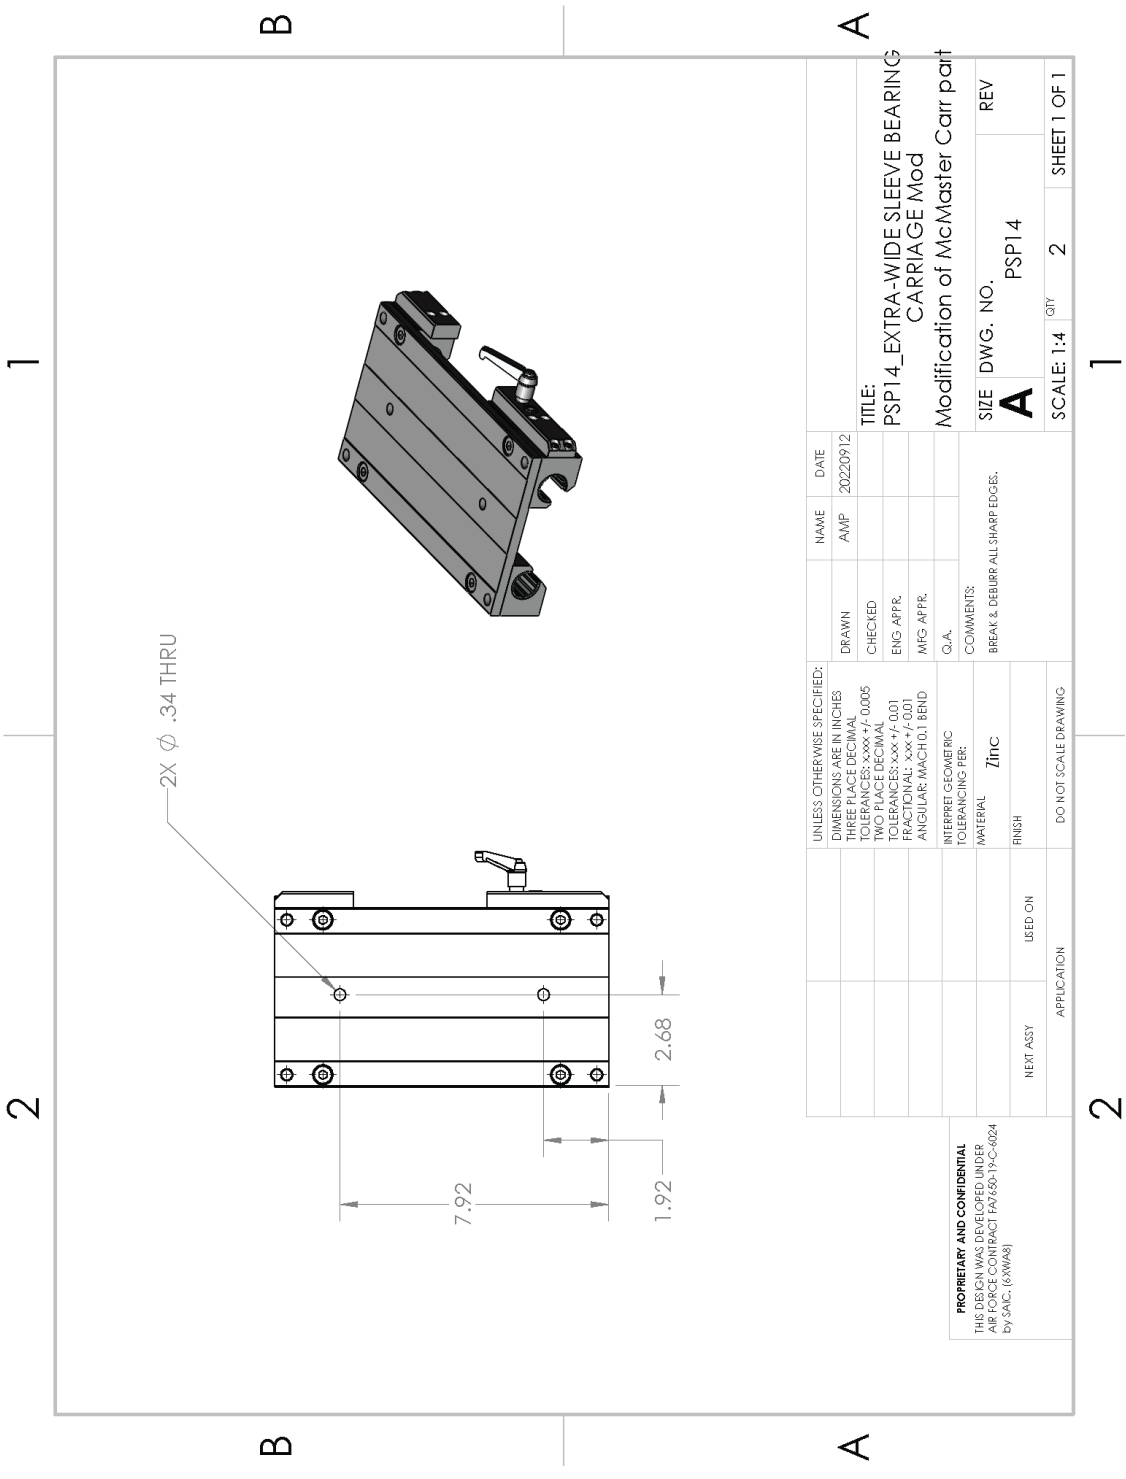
PSP14 Extra-Wide Sleeve Bearing Carriage Mod b
